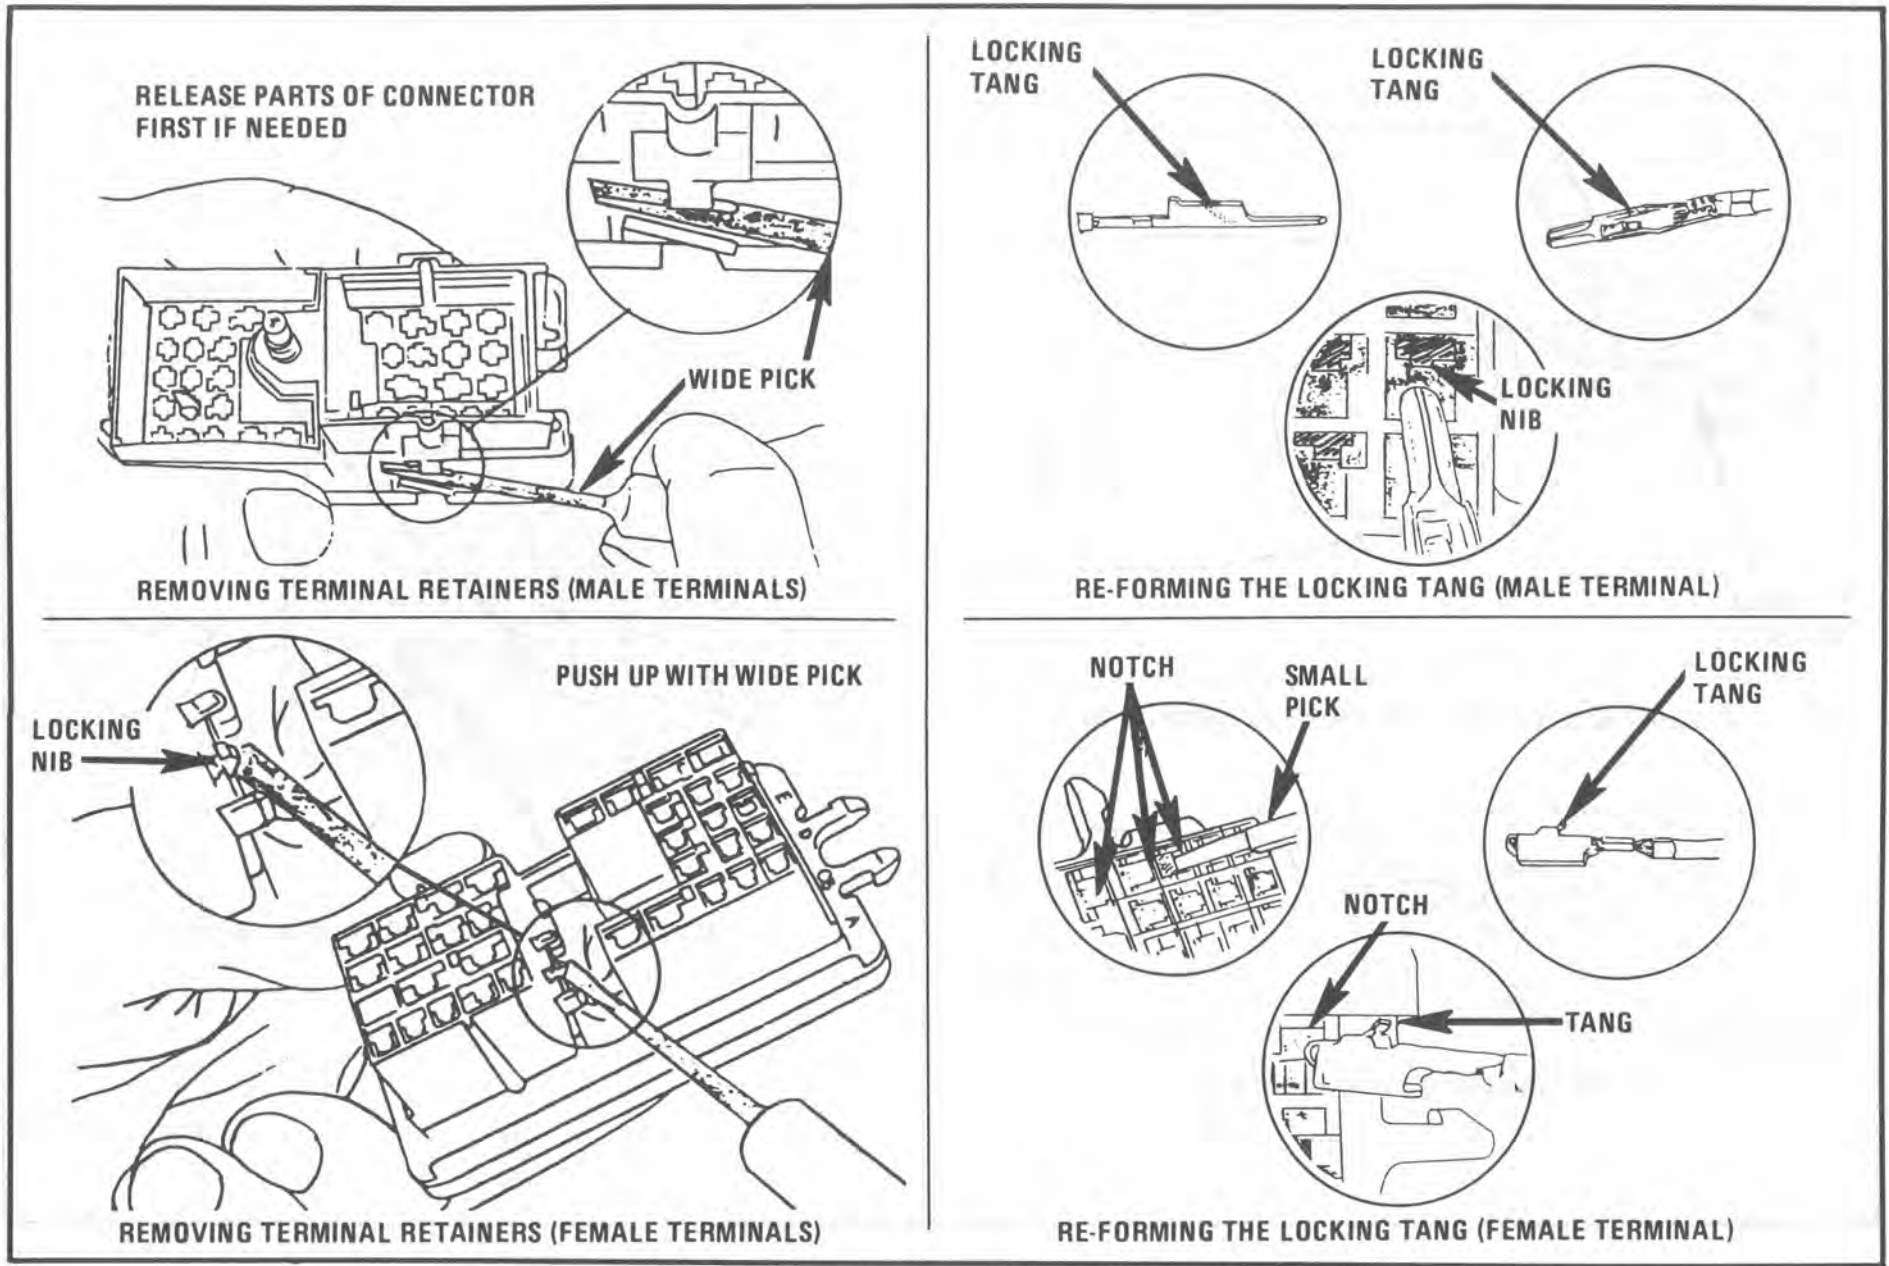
Metri-pack Type Connectors - Push-To-Seat Type
